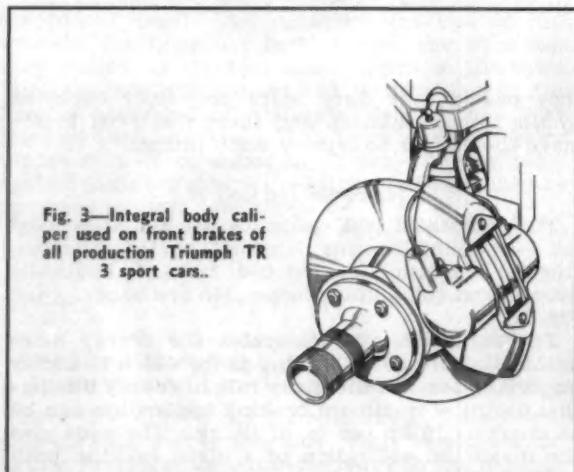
Integral body caliper used on front brakes of all production Triumph TR 3 sport cars.
